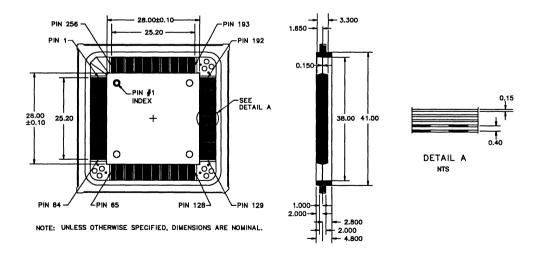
Molded carrier ring QFP, 256-lead customer package outline (1 of 4)
